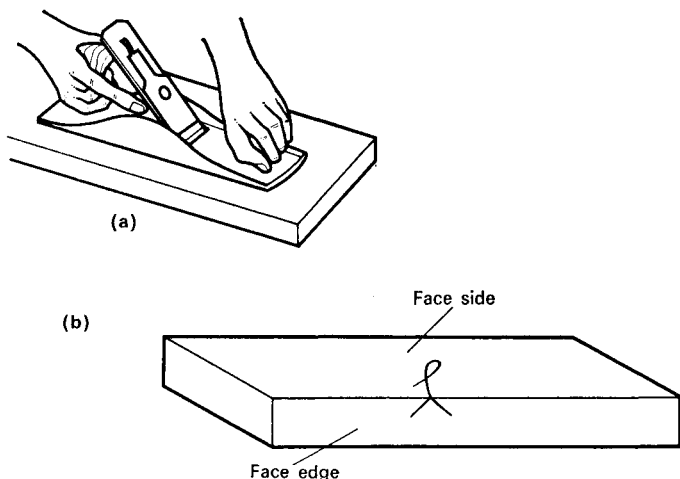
(a) The correct way to hold a steel plane for surfacing. (b) The face side and face edge showing face and edge marks.
